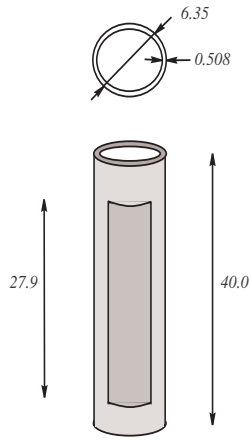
Piezoelectric tube dimensions (all measurements in mm).
